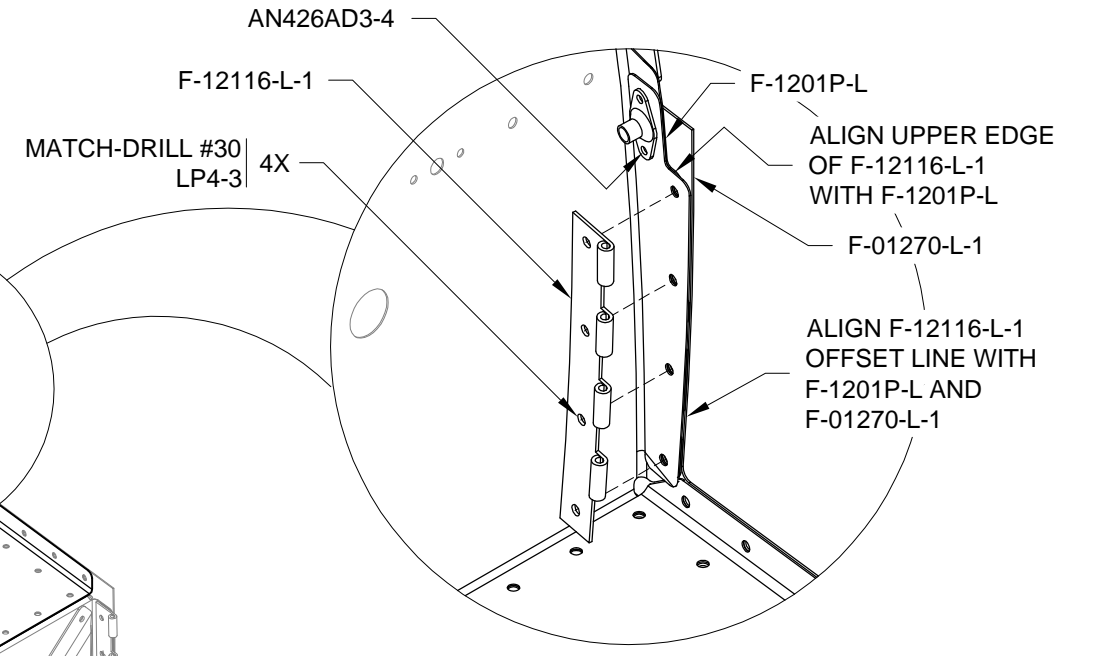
ATTACHING THE UPPER FIREWALL ASSEMBLY
